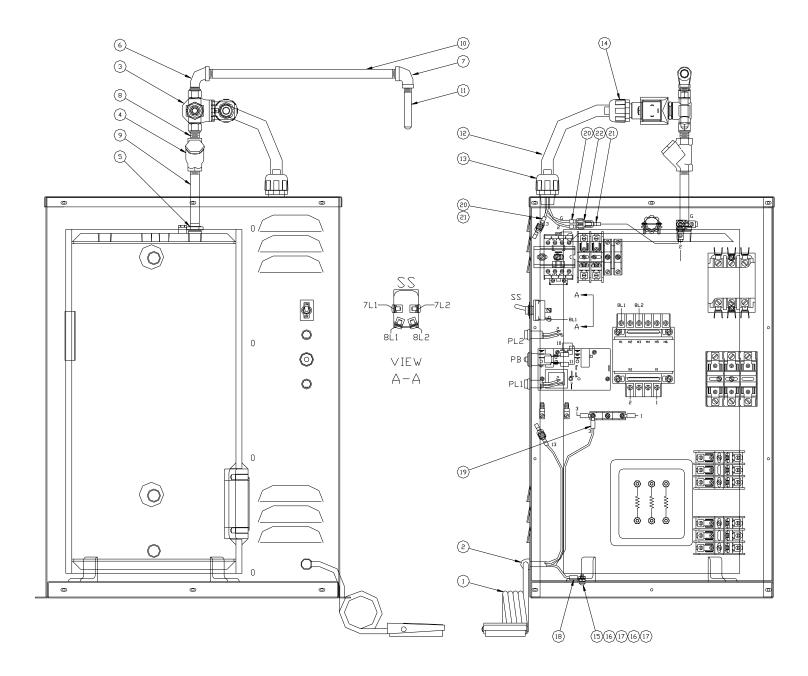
75308 (rev B) Water Pump Assembly Kit 380-460V, 3 Phase, RHPG/ JEL 6, 9, & 12 KW
